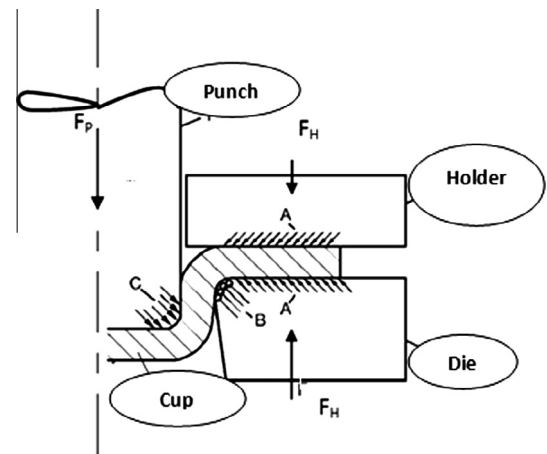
Friction areas when a deep drawing a cup. (A) friction area between sheet metal blank and holder and sheet metal blank die; (B) friction area between sheet metal blank and the die radius; (C) friction area between sheet metal blank and the punch edges; F_{ges} , total drawing force; F_N , blank holder force; 1, punch; 2, blank holder; 3, die; 4, cup; 5, flange area; 6, cup wall; and 7, base of the cup [25].
